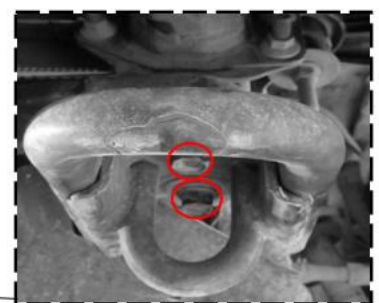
Remove OEM Tow Loop (Driver Side Shown)
